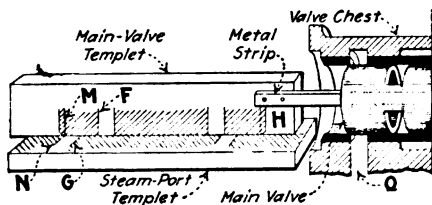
Templets arranged at end of valve chest ready for setting the valves.
